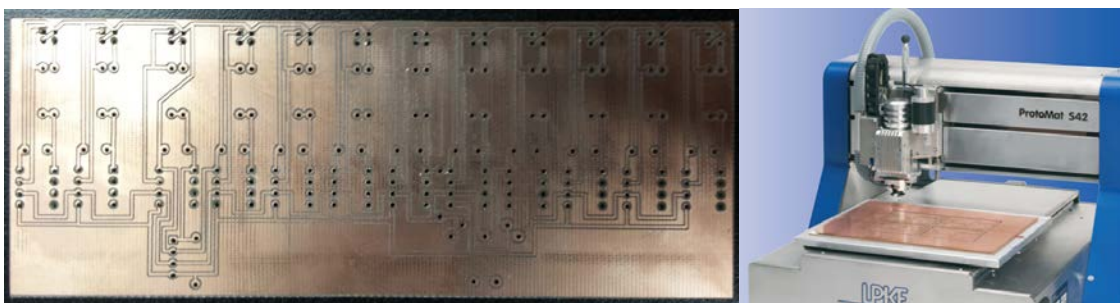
Control System Printed Circuit Board (left); ProtoMat S42 rapid printed circuit board fabrication system (right)
